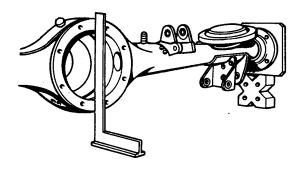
Checking Final Drive Mounting Surface for Perpendicularity
